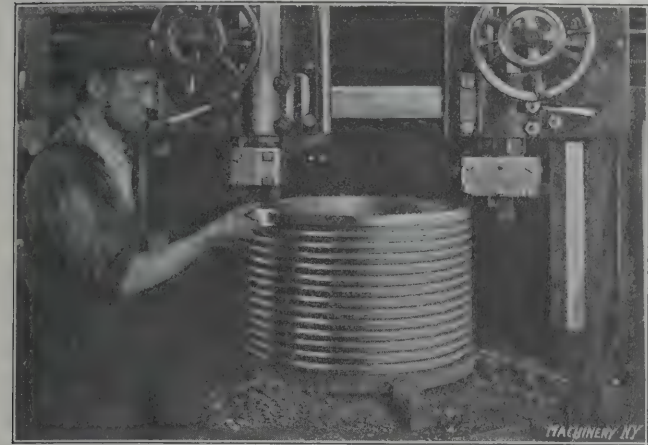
Turning L-shaped Dunbar Packing Rings in the Vertical Boring Mill
